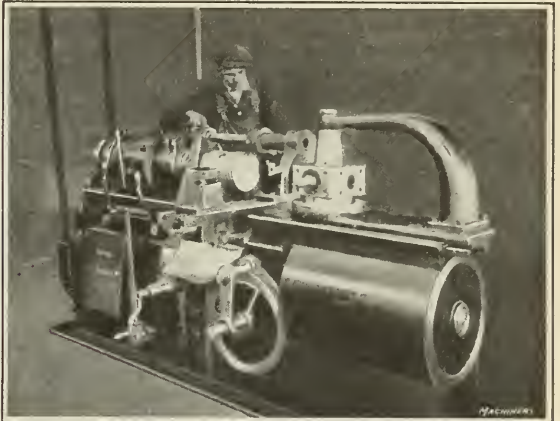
Potter & Johnston Automatic Lathe turning Pistons
